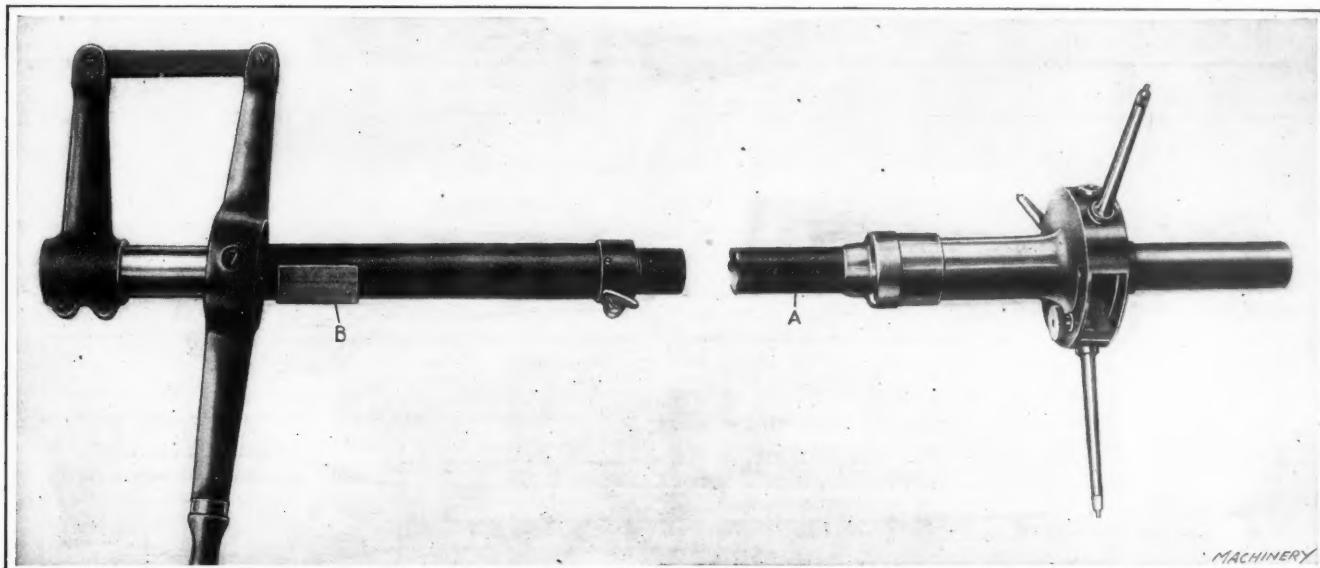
Pratt & Whitney Star Gage with Three-point Measuring Head
